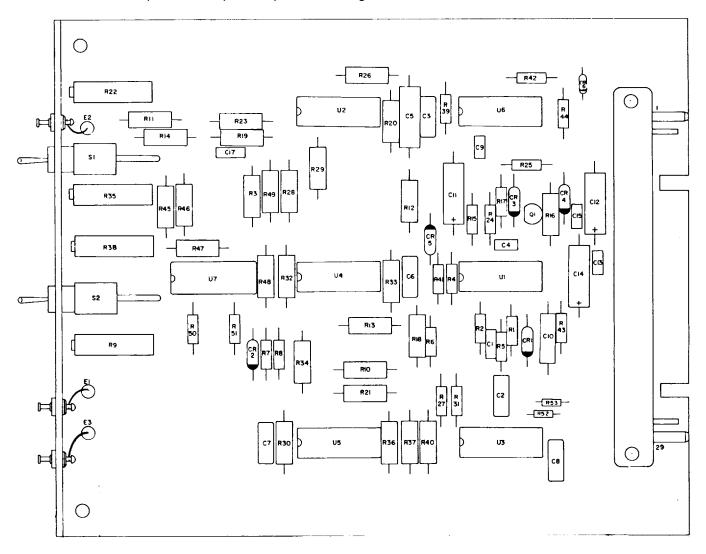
Variable Signal Processing Circuit Card Assembly, 1A3A3 Part Location Diagram
